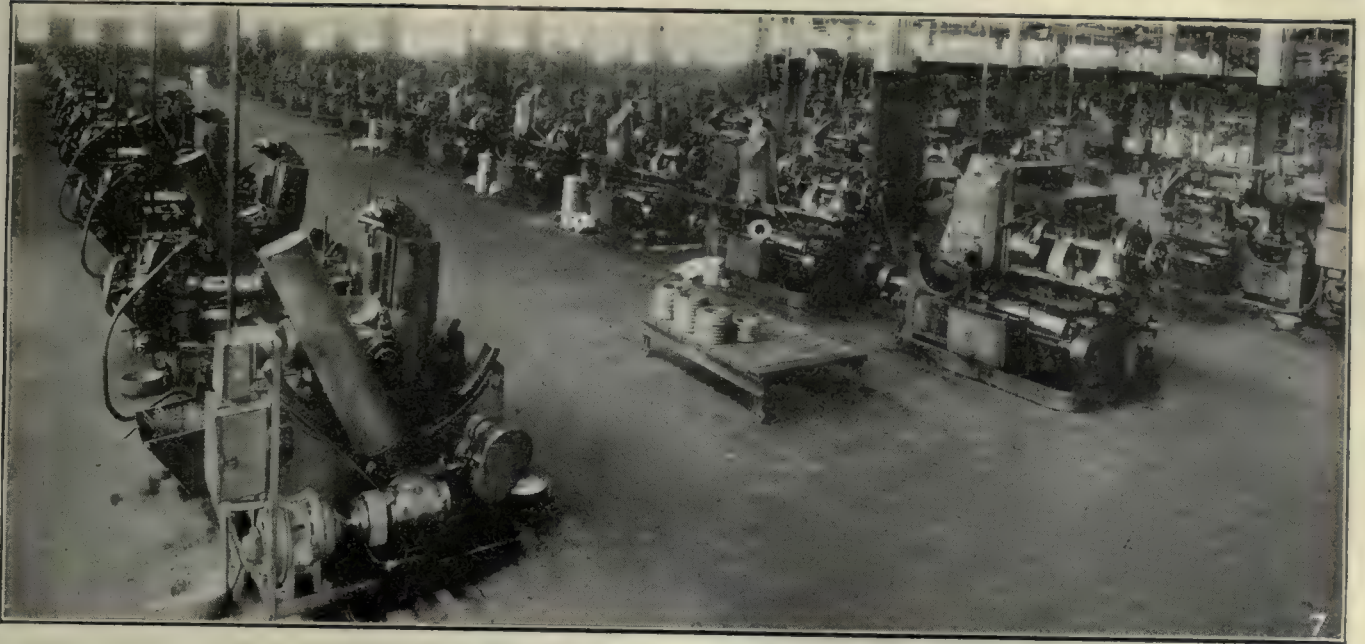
WHERE SPIRAL BEVEL GEARS ARE MADE. FIG. 8—LINE-UP OF TOOLS IN MAKING DIFFERENTIAL PARTS.
